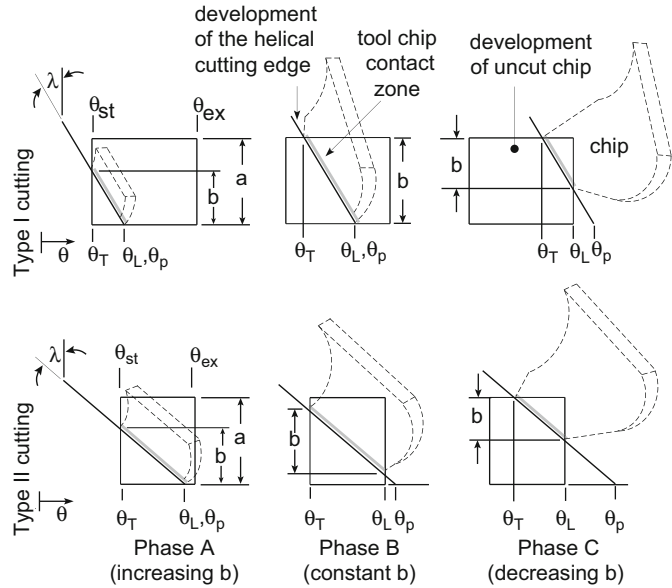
Progress of tool chip contact zone as the helical endmill rotates. In Type I cutting, $b = a$, during Phase B of the cut. In Type II cutting, $b < a$, always.
